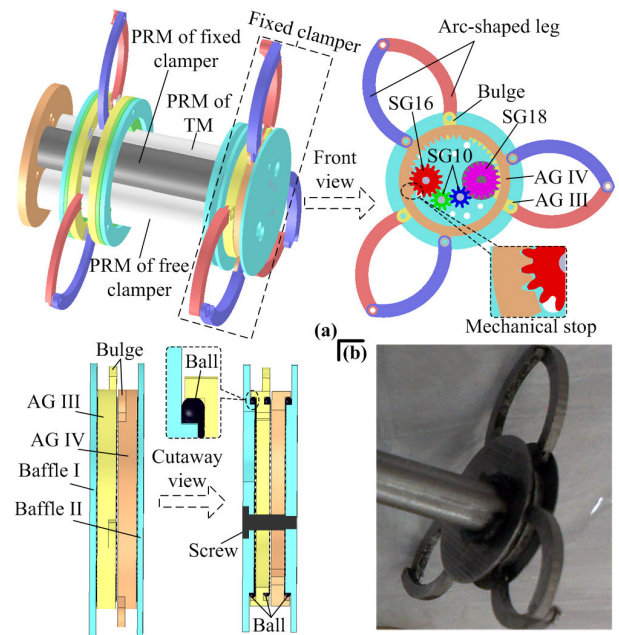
(a) Mechanical design and (b) assembled prototype of the fixed clammer.
